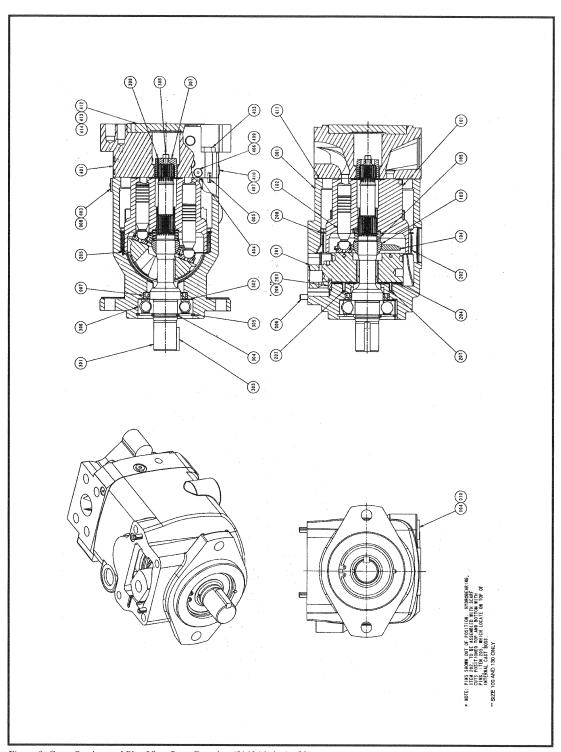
Cross Section and Plan View Parts Drawing (516246 sh. 1 of 3).
